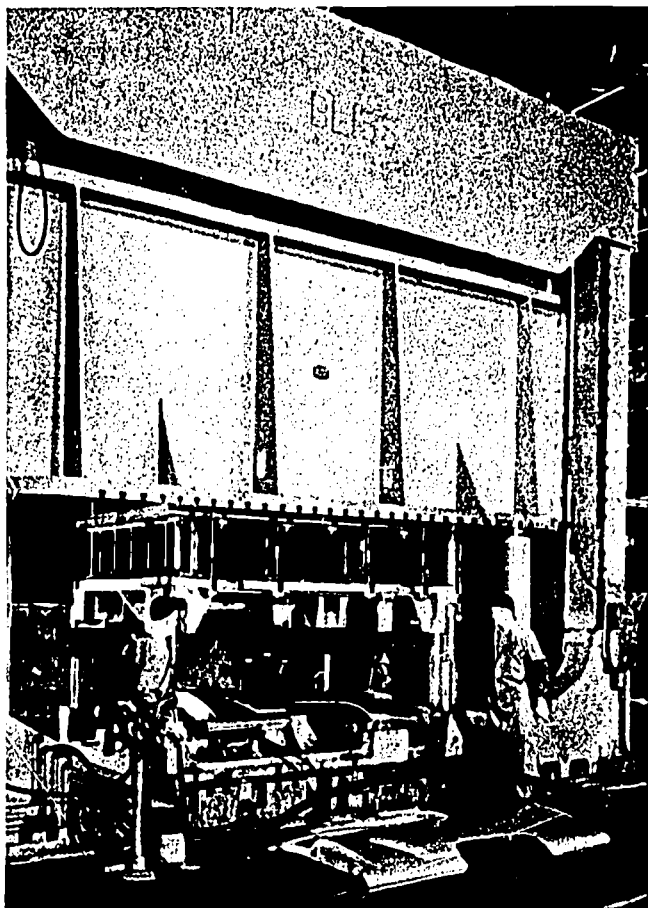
Some automobile parts are drawn by pressing sheet stock between two matched dies. Notice the shaped part on the floor.
